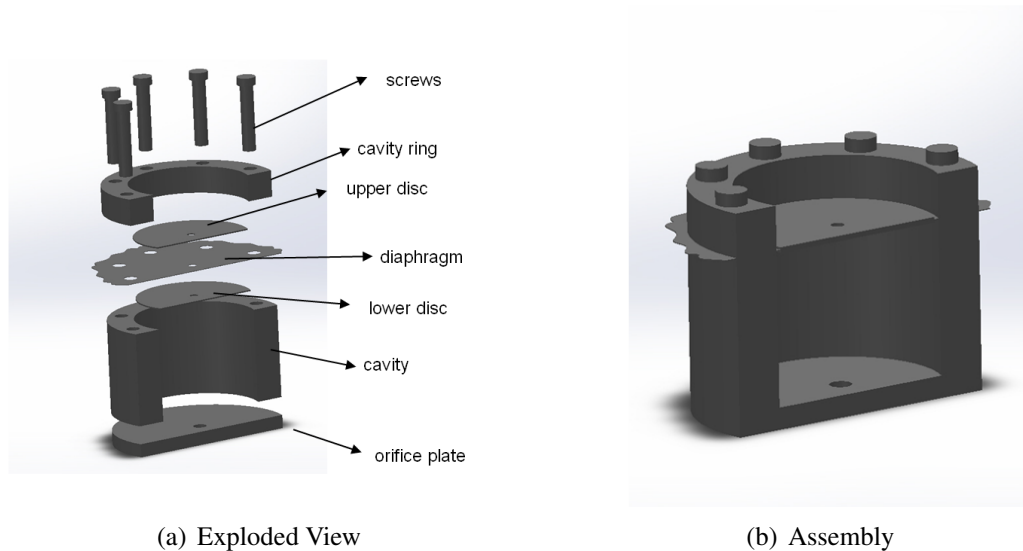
Technical drawing of the single synthetic jet mounted on a round cavity
